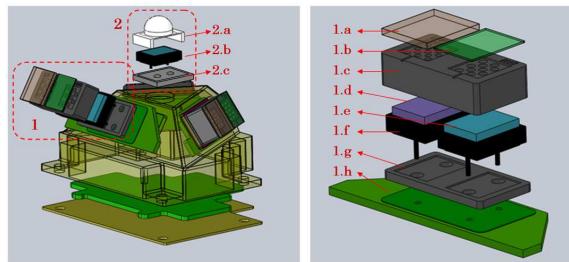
SIS OH Assembly. Opto-mechanical Set Assembly
